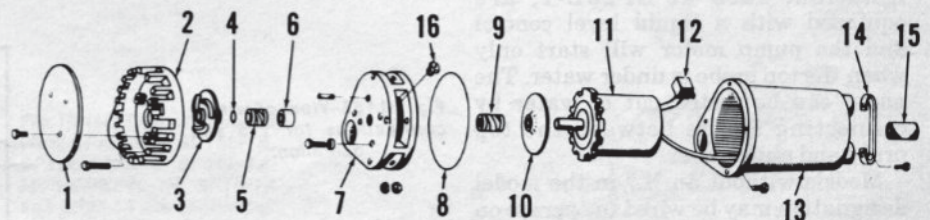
Exploded view of LSP2 series submersible pumps.
